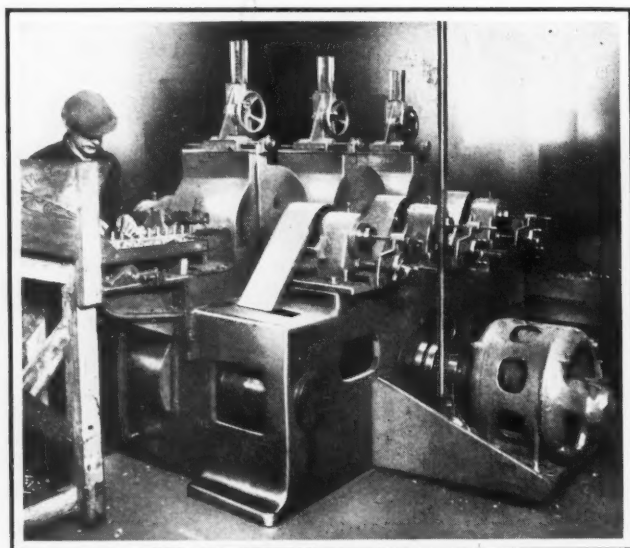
Gardner Triple-head Disk Grinder designed for grinding Hexagonal Parts
